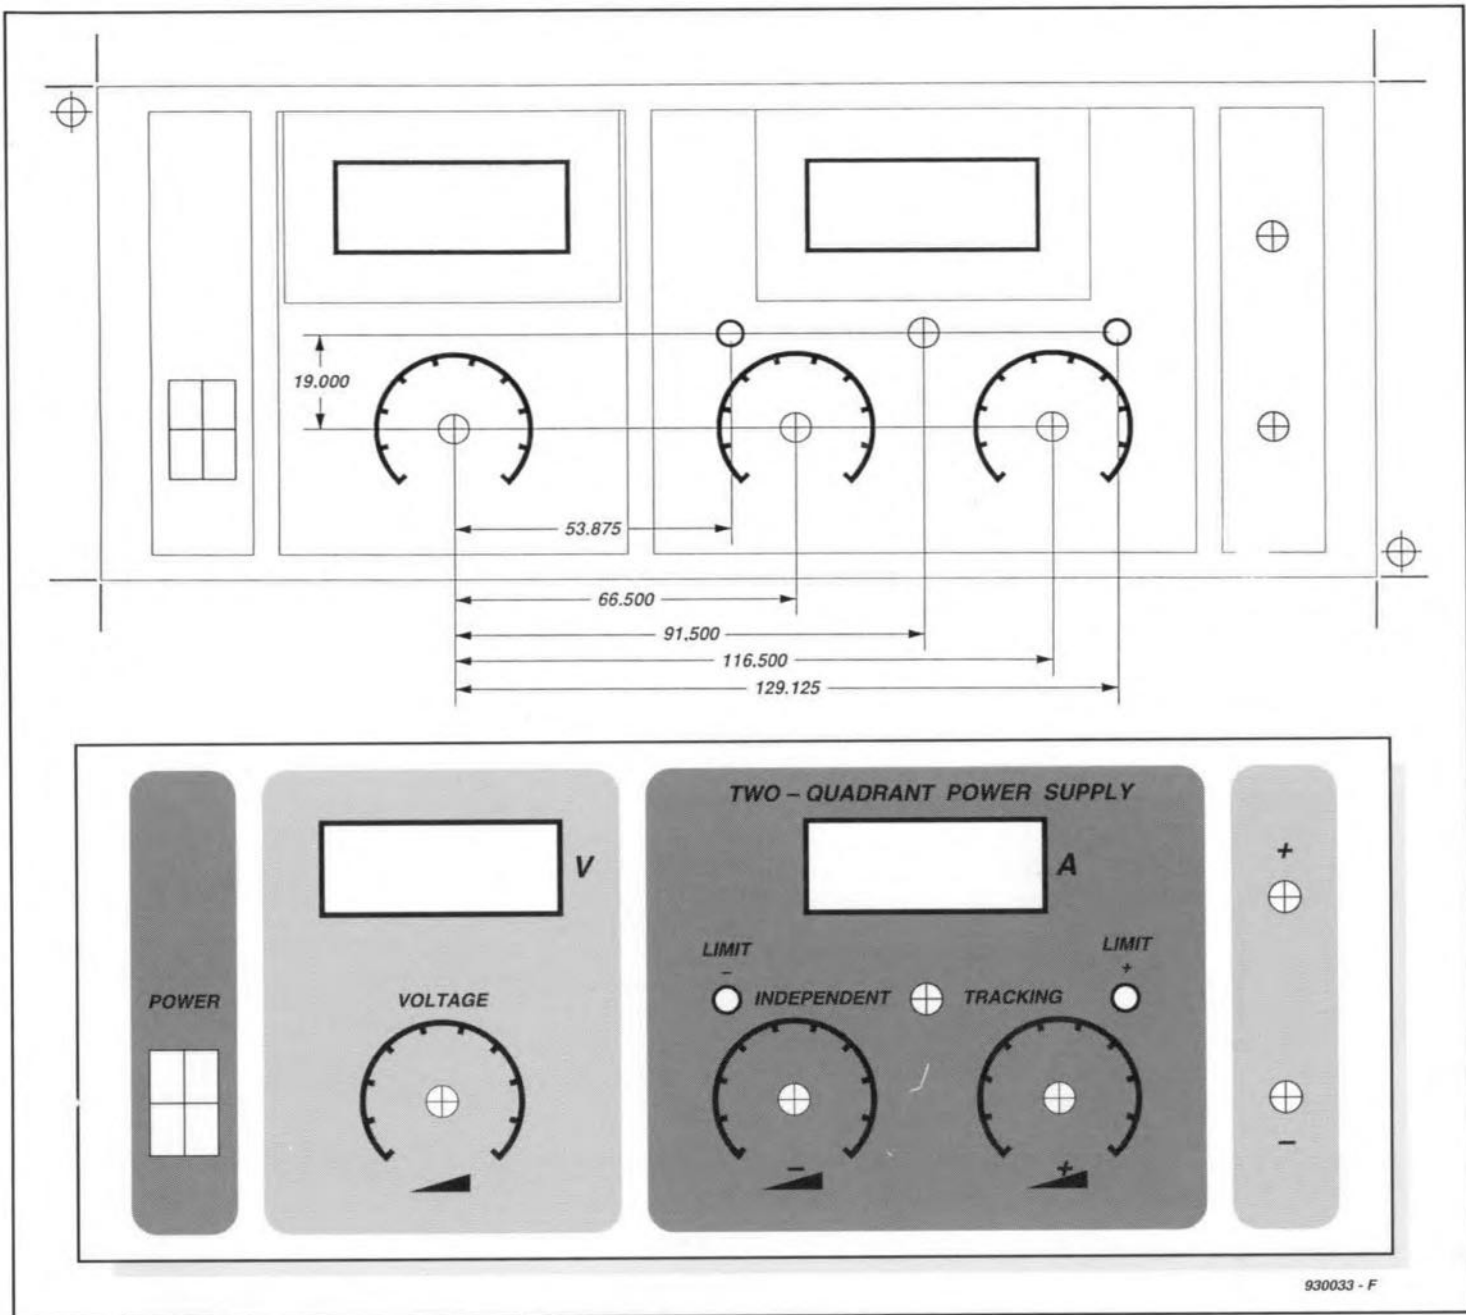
Front panel design for the workbench power supply unit. Dimensions are shown in millimetres.
